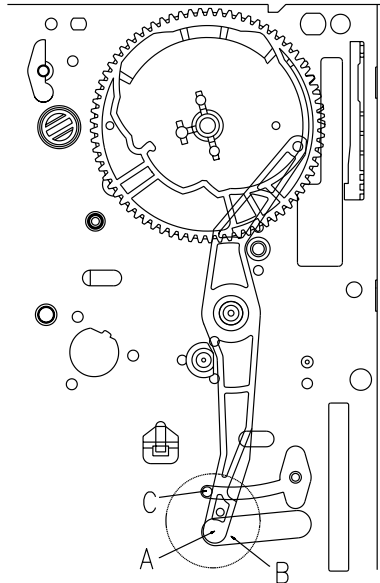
ASSEMBLY OF THE CAM GEAR & RELAY LEVER
